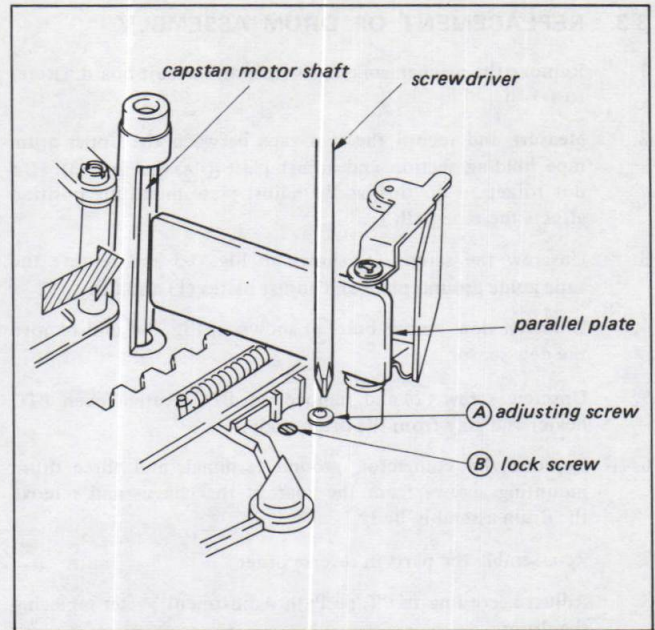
Perpendicular adjustment of capstan motor shaft
